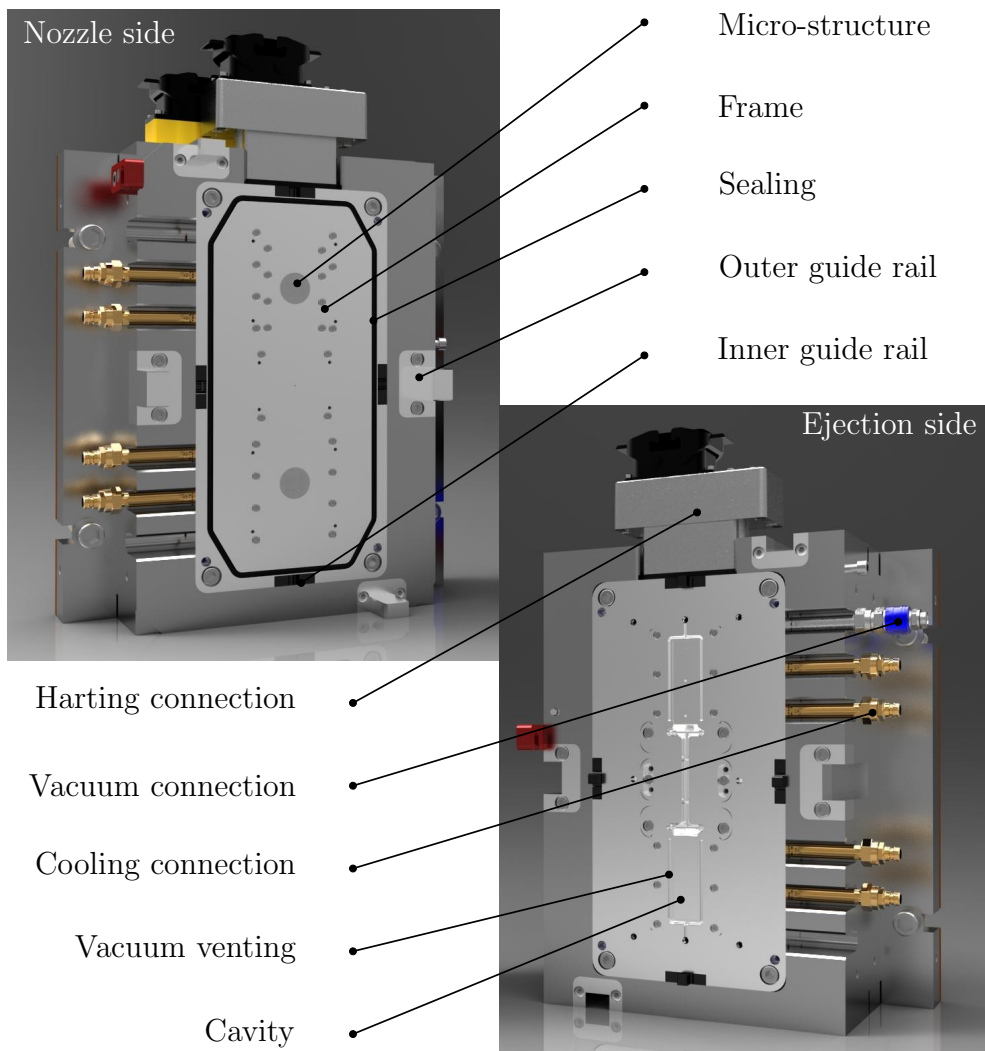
3D-Rendering of the CAD files of final mold design before being commissioned [13].
